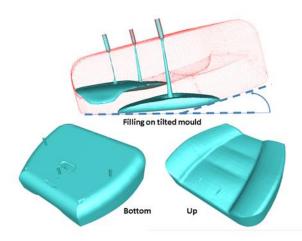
Phase of deposition of foam on inclined mold - Final shape with surface defects on the underside
